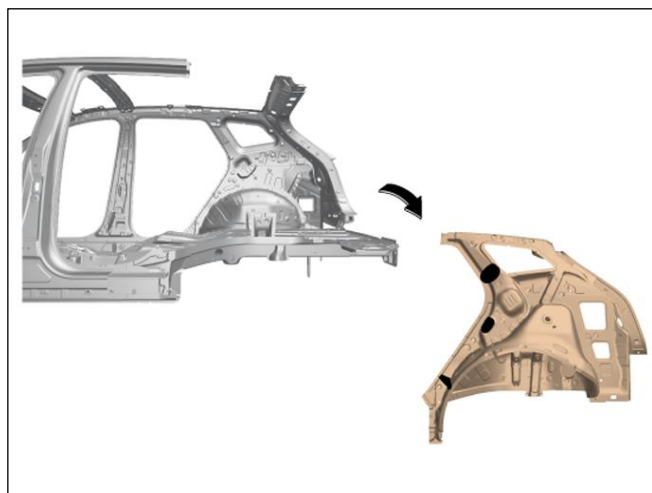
Inner rear quarter and wheelhouse sub-assembly.
